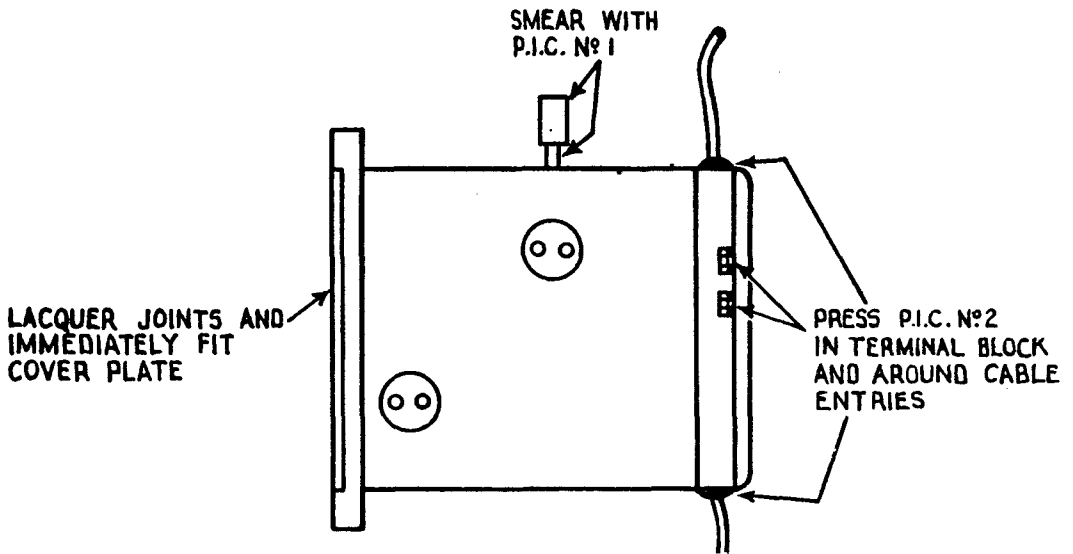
Instructions for weather-proofing the earlier type inertia switch
